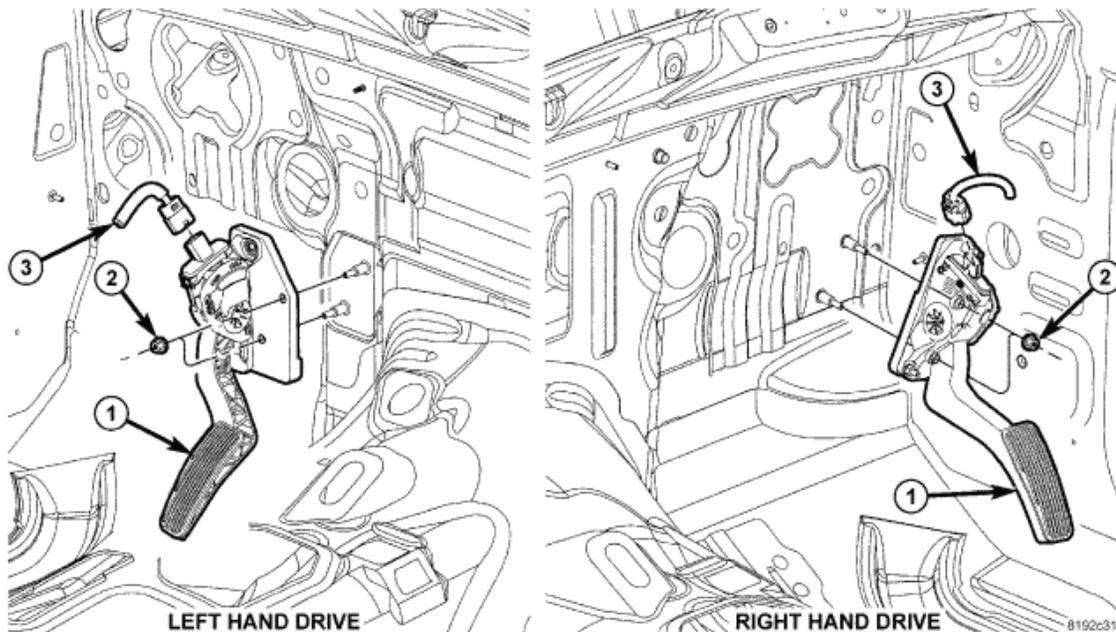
Accelerator Pedal - Without Accelerator Pedal Position Sensor
